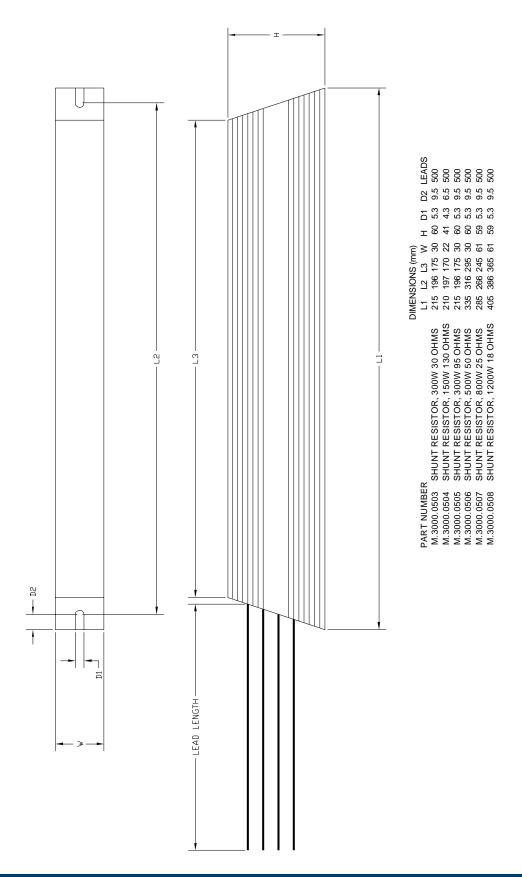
Mounting Dimensions for Reduced Size Panel mount Shunts
